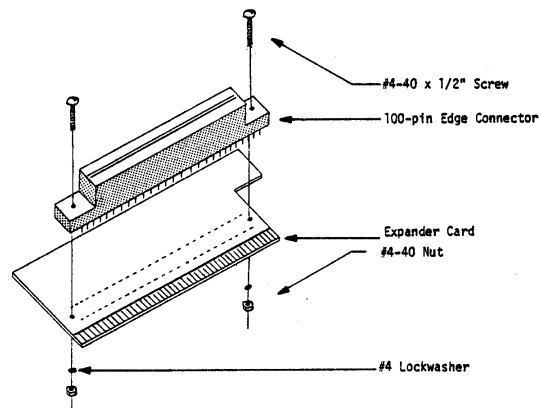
A. Installation of 100-pin Edge Connector onto Expander Card
